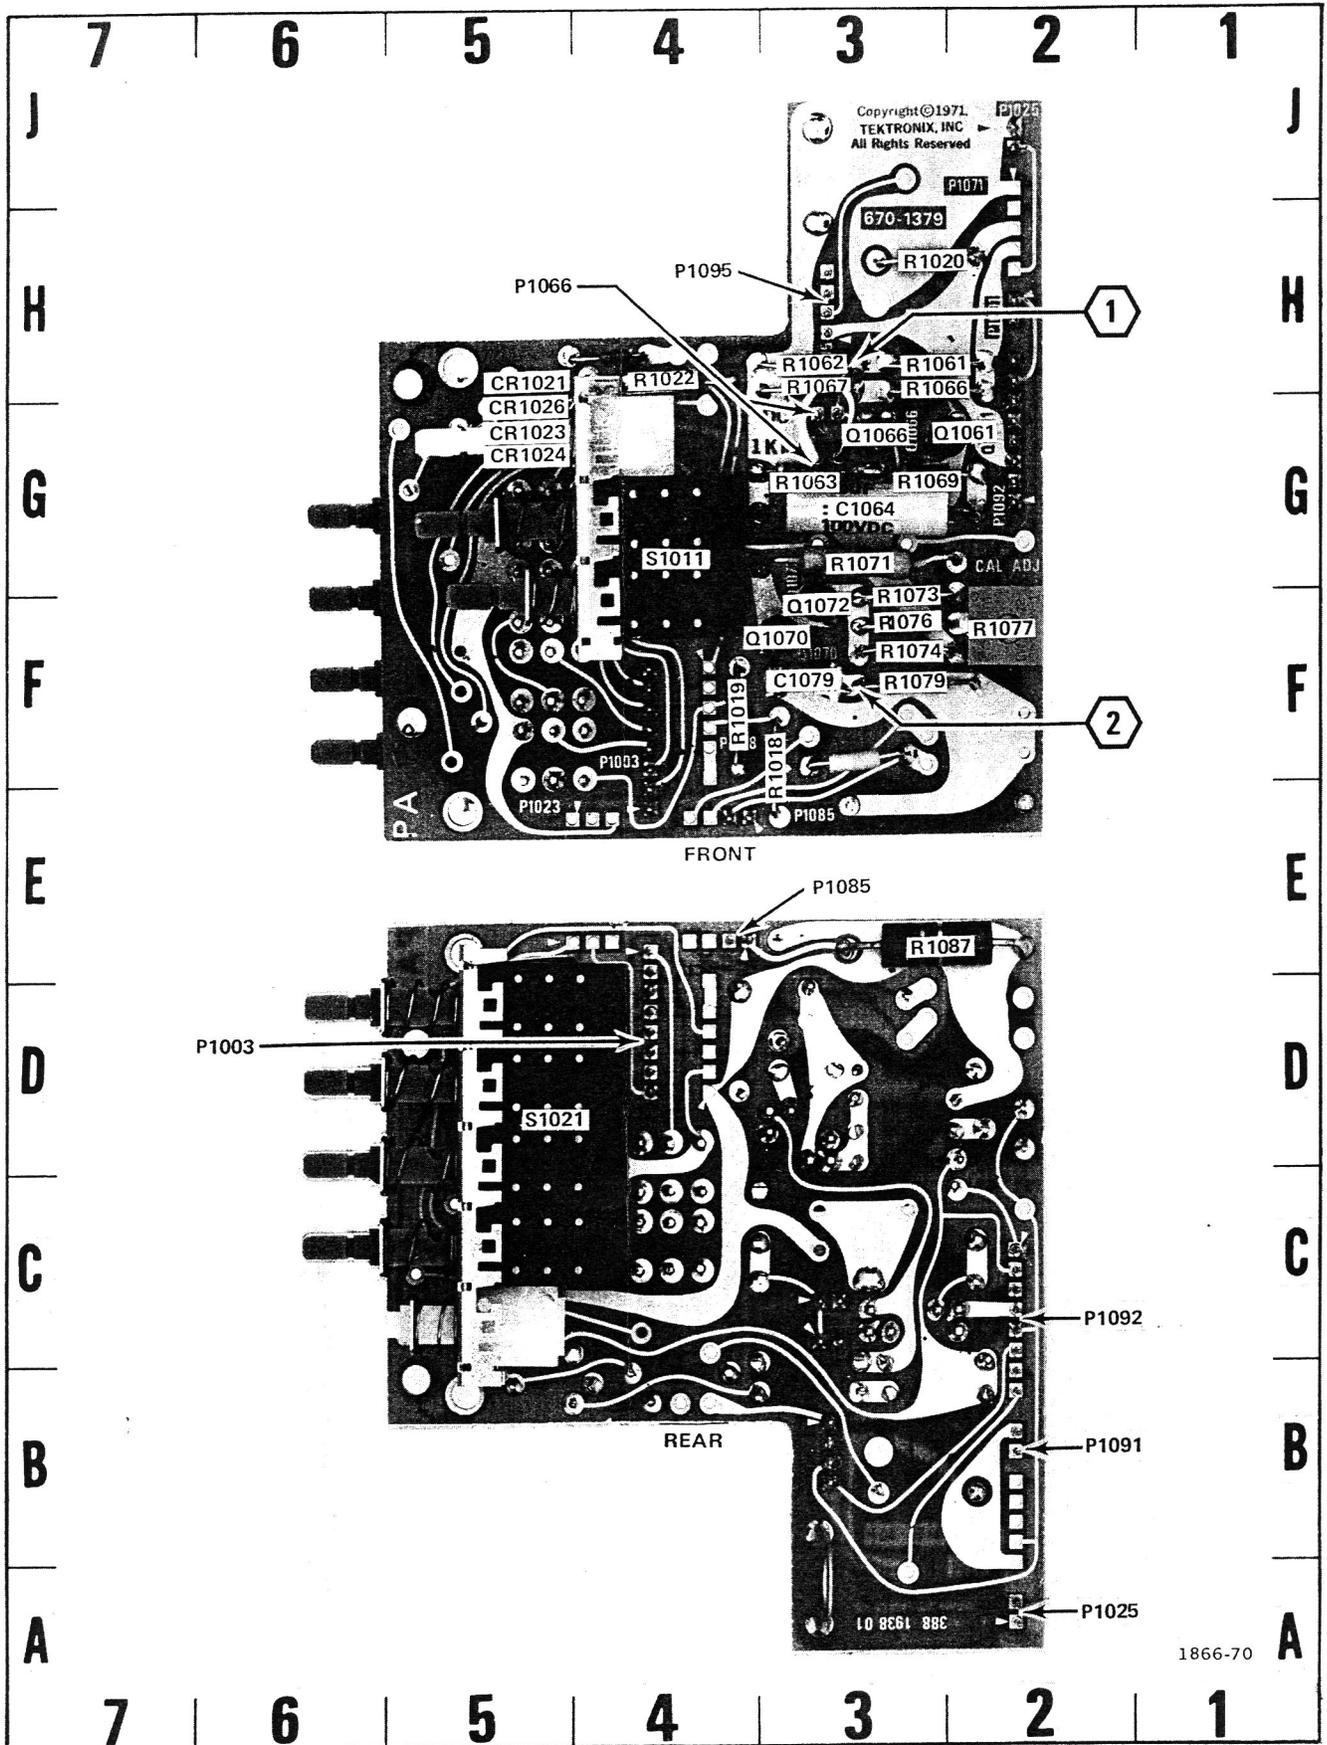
A7-Calibrator and Mode Switches circuit board assembly.
